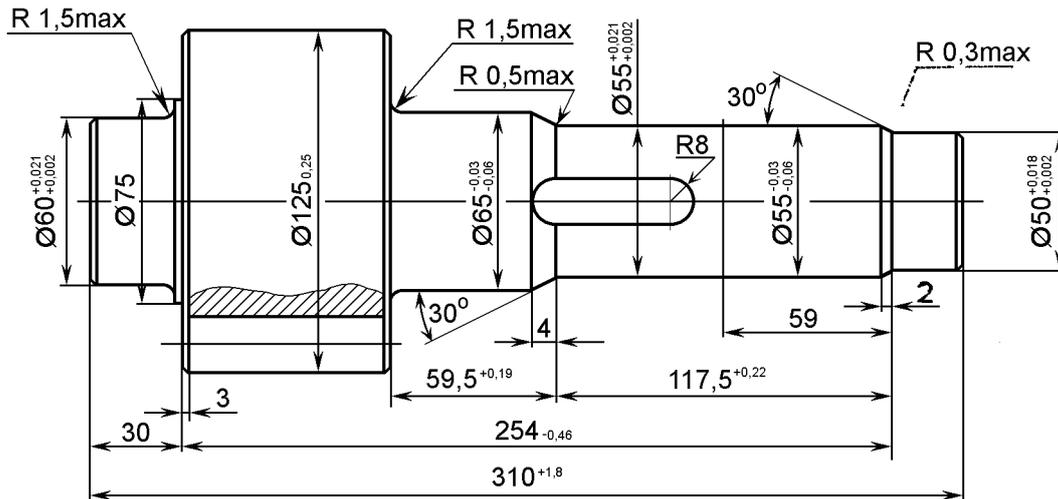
Shaft-pinion of gear drilling rig of BGA-2M type
